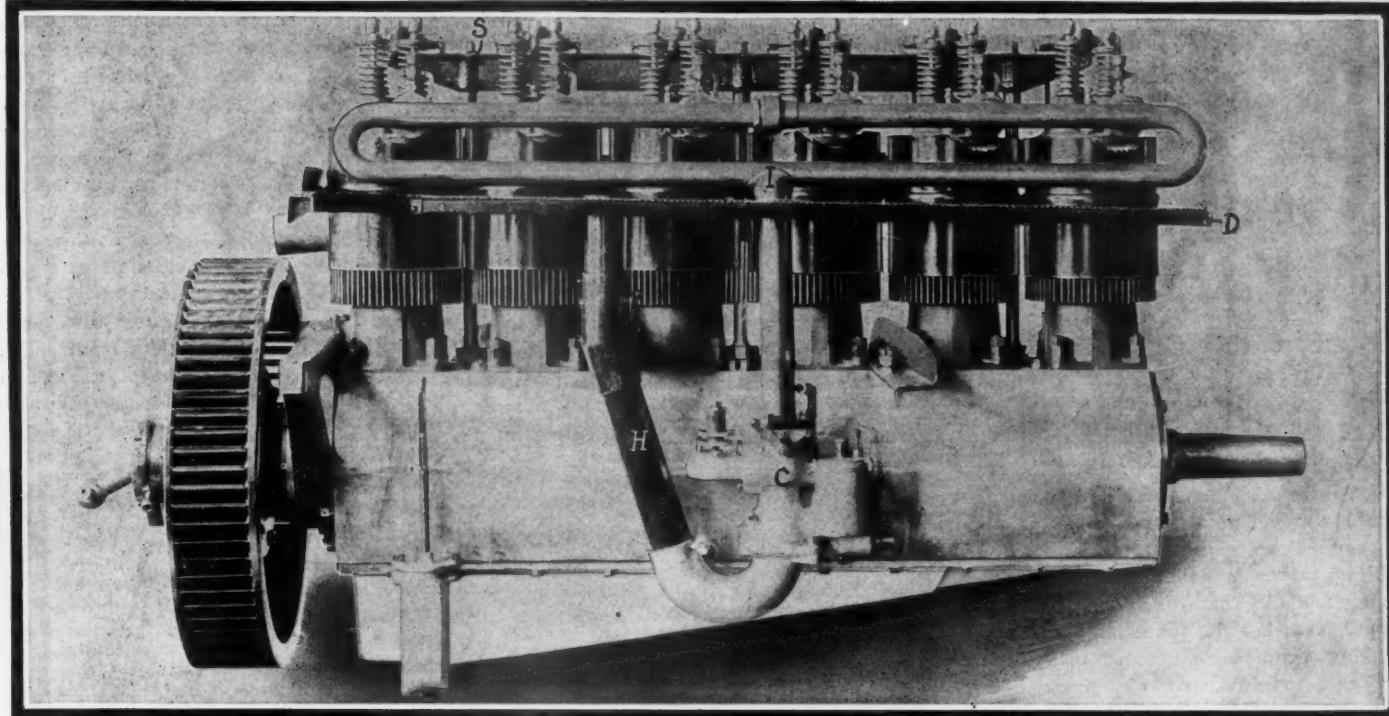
INLET SIDE OF FRANKLIN SIX-CYLINDER MOTOR
